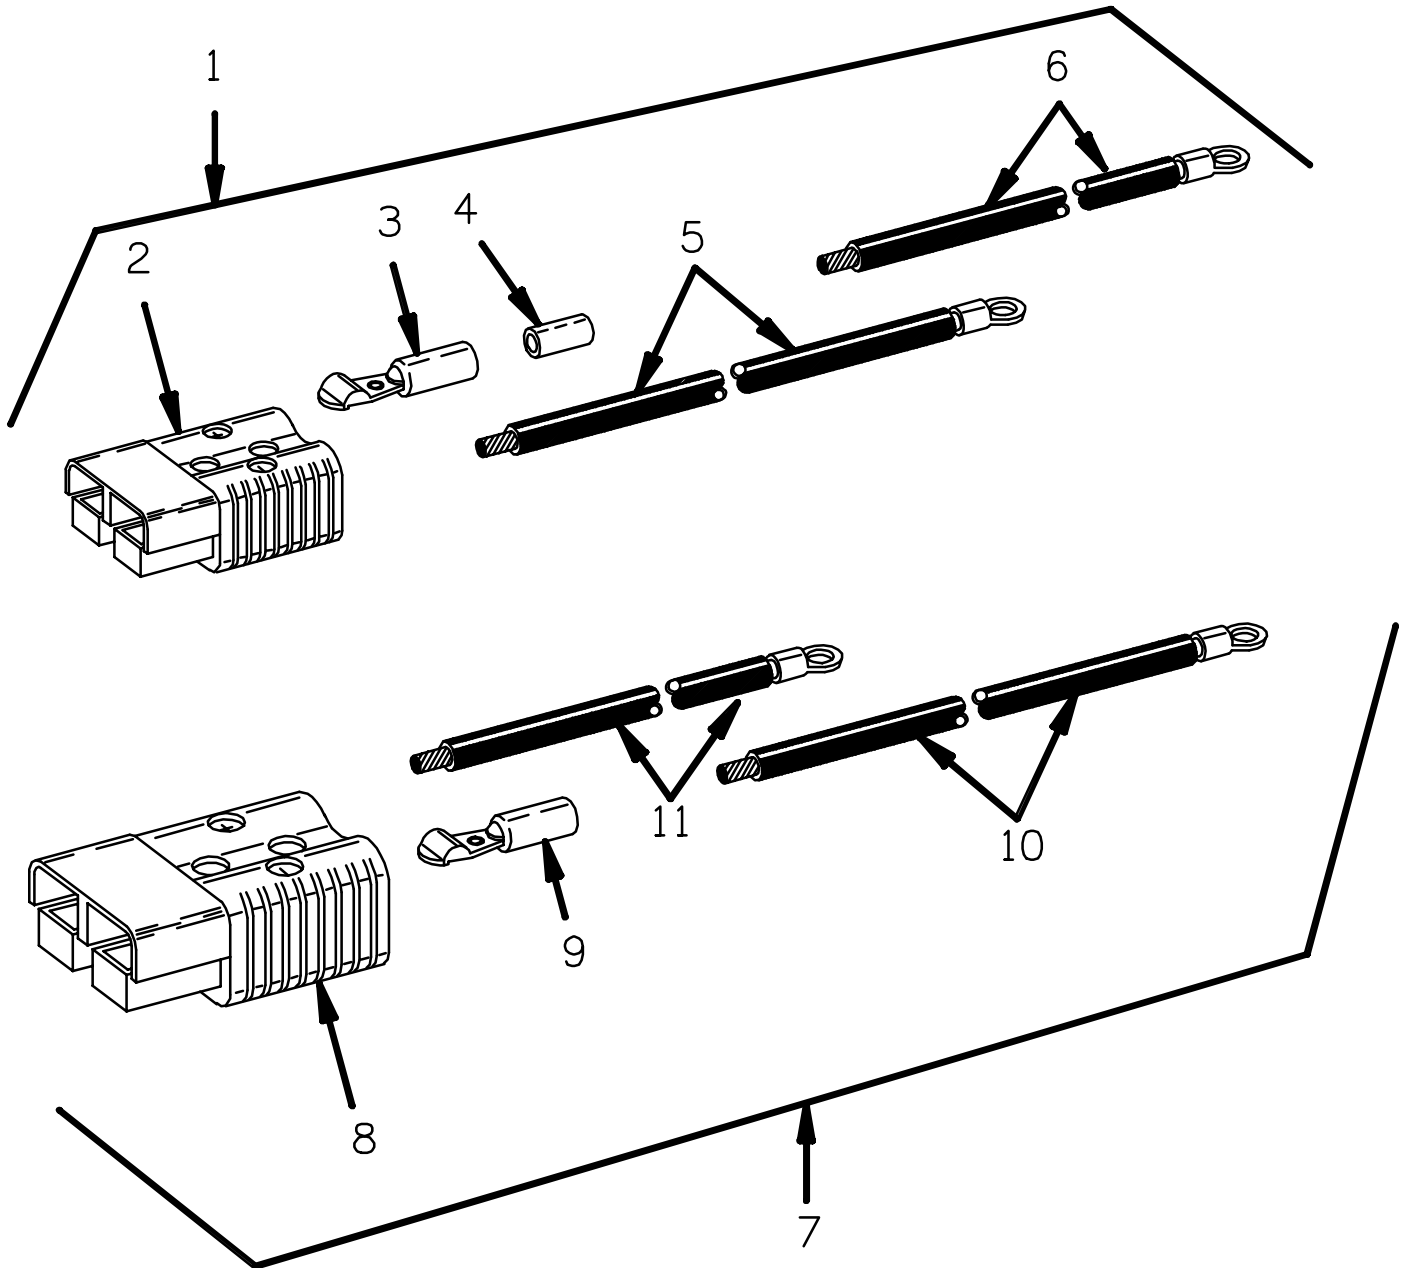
TRANSISTOR CONTROL WIRING HARNESS ASSEMBLY
